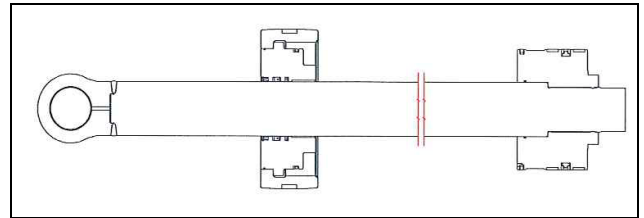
Piston, Head and Barrel Cap Disassembly (Main Boom Lift Cylinder)
